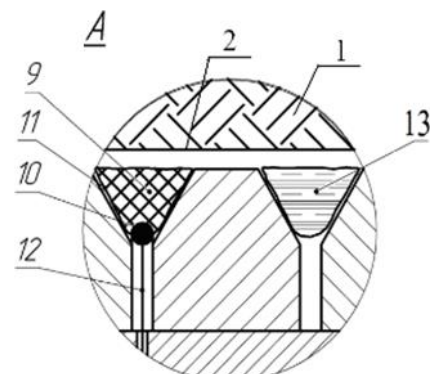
Longitudinal section of a part of the device for drilling and blasting expansion of wells in the initial position
